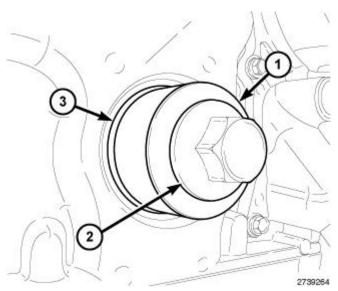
Front Crankshaft Seal Installer & Oil Seal Courtesy of CHRYSLER GROUP, LLC
